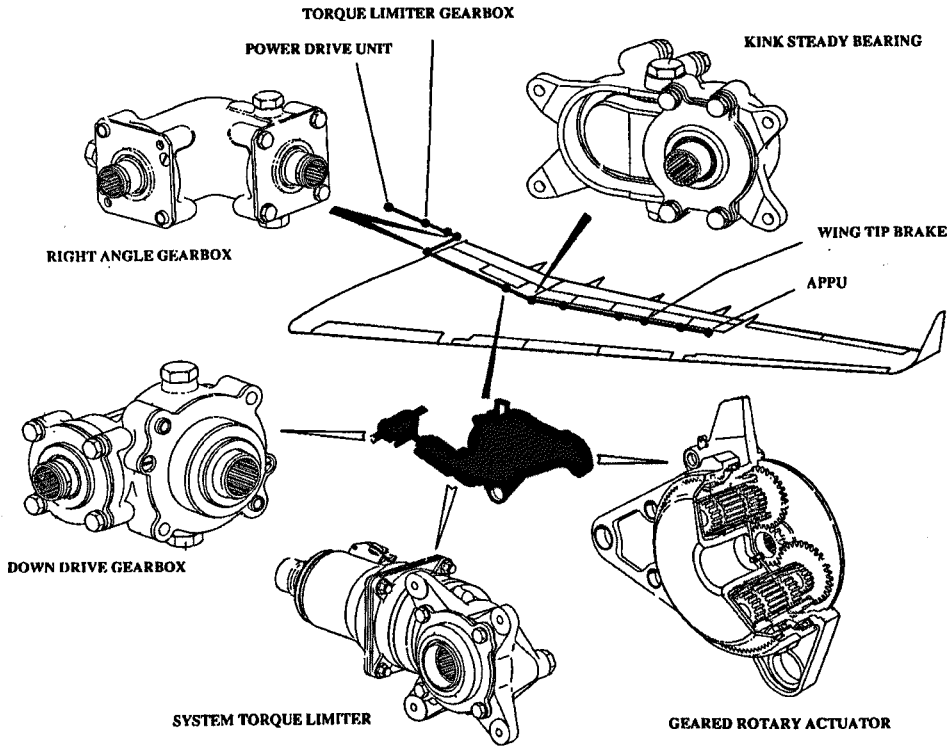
Typical Geared Rotary Actuator Flap Transmission System.
